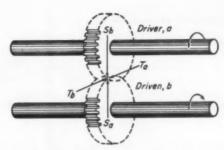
SPUR GEARS have two force components tangential and separating. Forces on each gear of the pair are equal and opposite. Separating force tries to push the gears apart. Tangential load direction is determined by remembering that it produces the rotation of the driven gear and is opposite for the driving gear.
